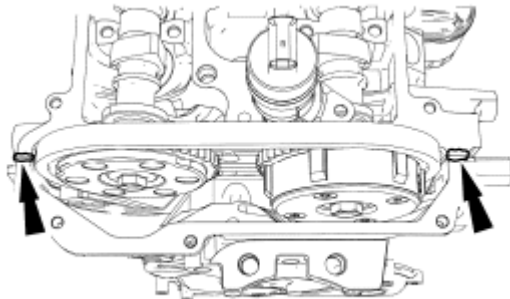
Locating Silicone Gasket And Sealant Applying Locations
